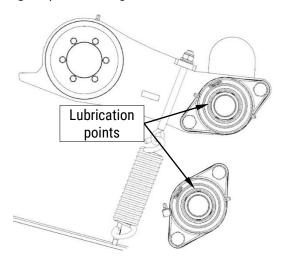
Bearing lubrication point with LT43 grease in roller conditioner
